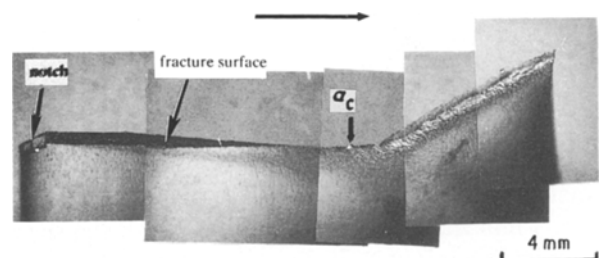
A composite optical micrograph of one half of fatigue-broken specimen showing the yielding as well as the slanting of the fracture surface.
